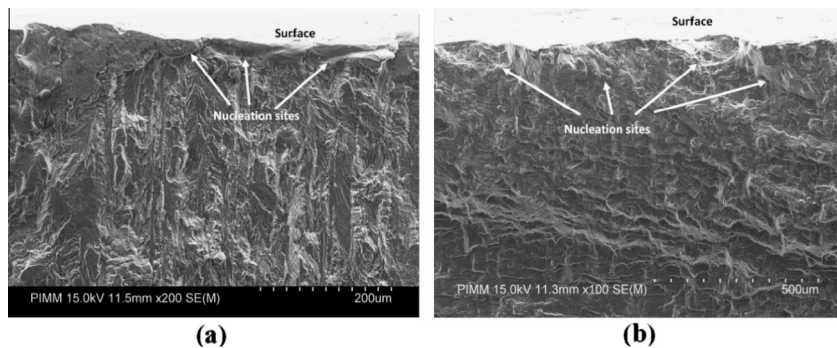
Fatigue crack nucleation site, (a) surface fractured of machined specimen loaded at 64.8 MPa ($R = 0.1$) until NR = 288,282 cycles, and (b) surface fractured of wire brush hammered specimen loaded at 69.6 MPa ($R = 0.1$) until NR = 243,463 cycles.
